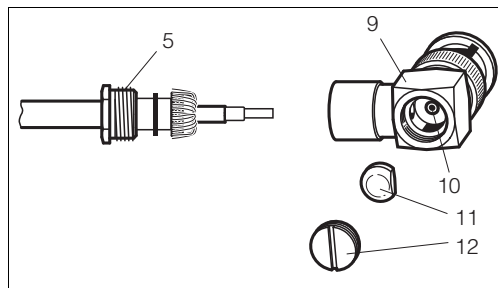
Terminating the pH connecting cable for mounting the BNC elbow plug
